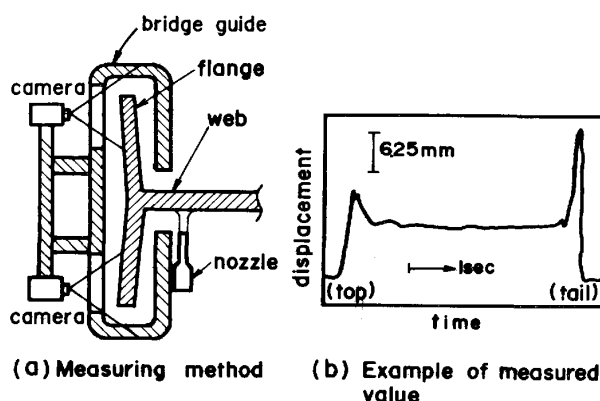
Measurement of displacement of the wideflange beam in the Shape Mill.
